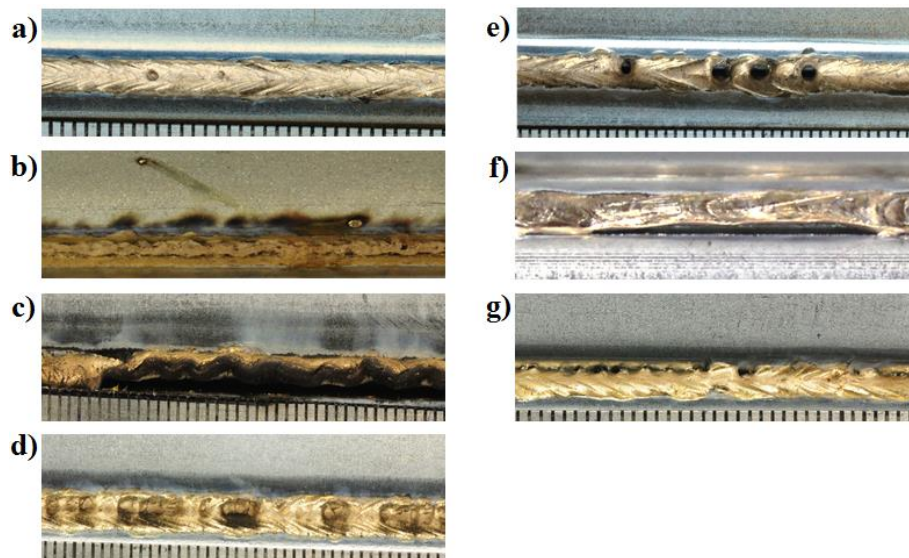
Typical imperfections in laser brazing process: (a) surface pores; (b) spatter; (c) single-sided wetting; (d) rises; (e) open-out blow holes; (f) skip; (g) saw tooth surface. [Note: experimental observations]
